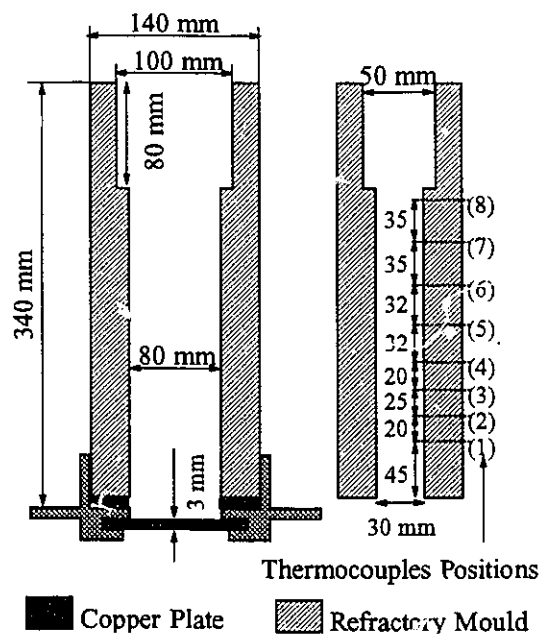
Schematic and dimensions (in mm) of the mould.
